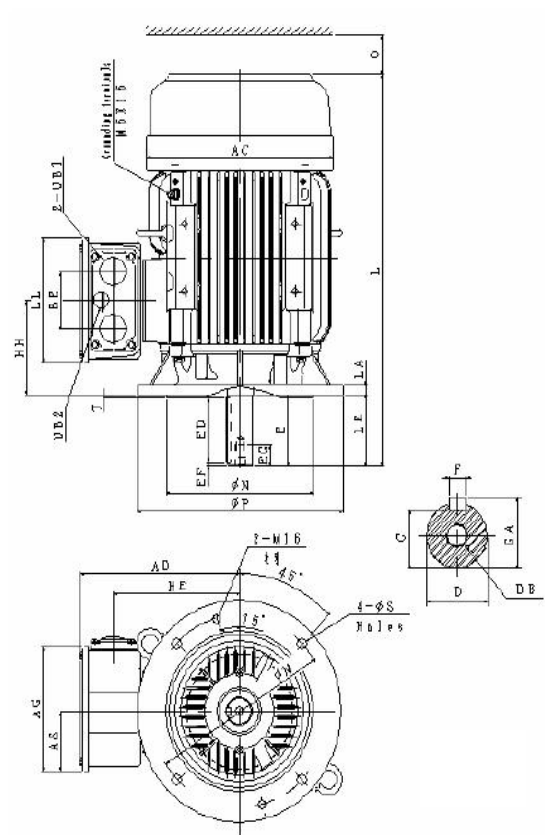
Outline drawing of cast iron design, mounting V1; frame size 160
